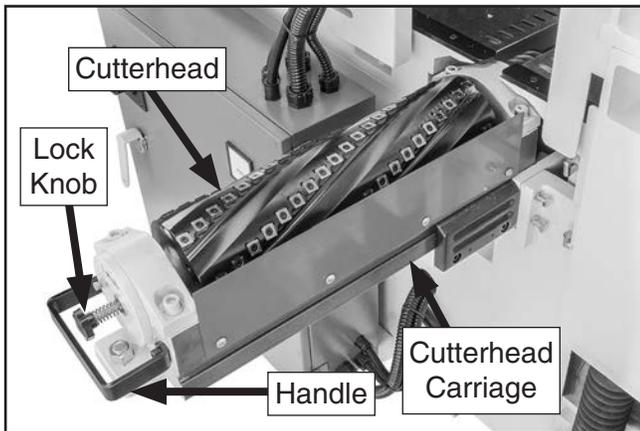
Lower cutterhead pulled out of cutterhead carriage.
